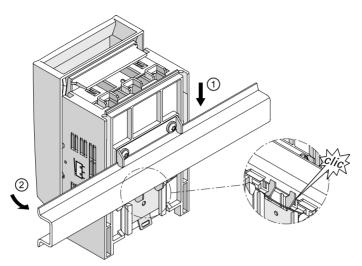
Mounting the fuse switch disconnector, size 000 onto a standard rail (2)
